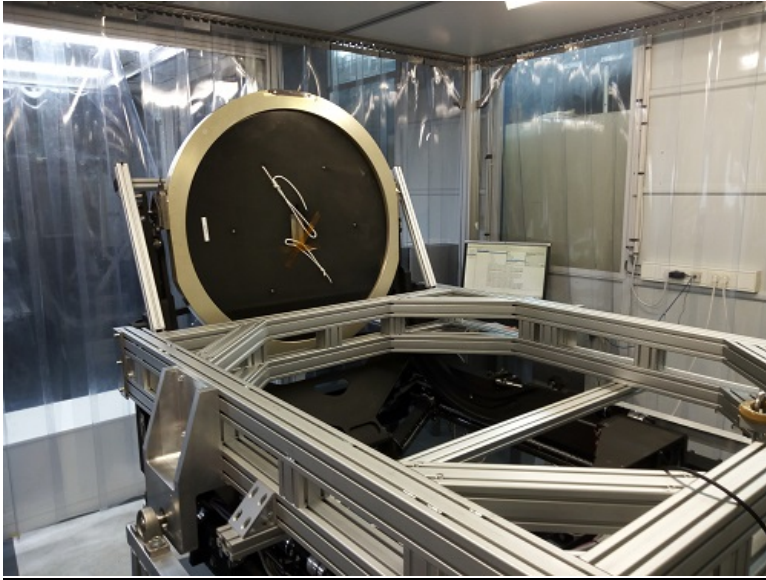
Integration of the carousel rotating mechanism with the Camera back flange at LPNHE. As shown, the two units are tightly integrated, with carousel components installed within the back flange casting (gold-colored structure). Work is currently on hold due to an injury safety incident.
